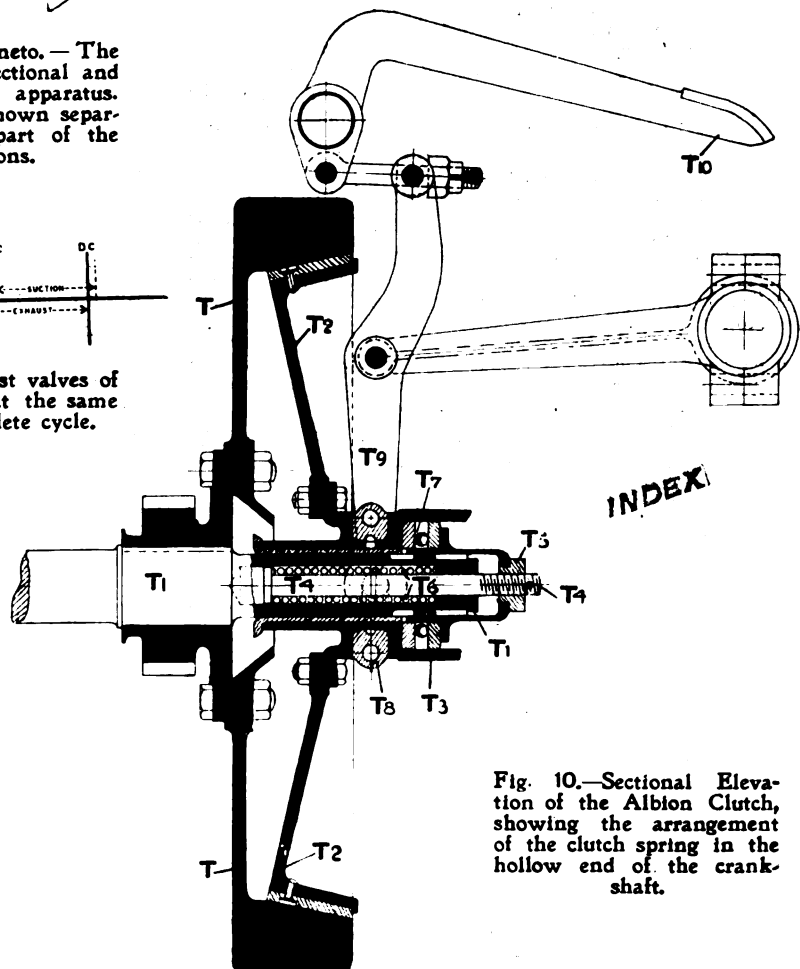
Sectional Elevation of the Albion Clutch, showing the arrangement of the clutch spring in the hollow end of the crank-shaft.
